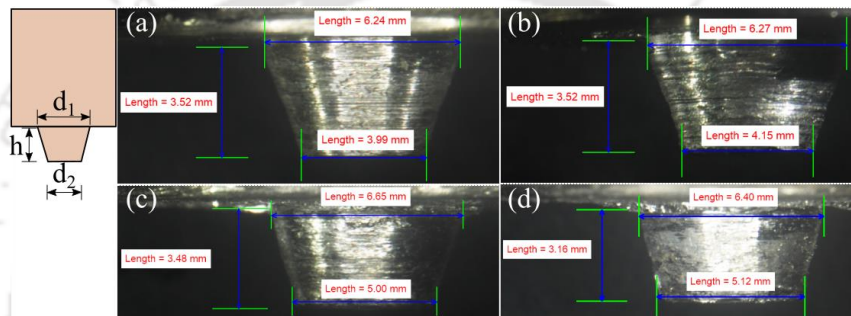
Progressive variation in the tool pin geometry when welding at 1200 rpm and traverse speed of (a) initial tool under no weld condition, (b) 30 mm/min, (c) 60 mm/min, and (d) 90 mm/min
